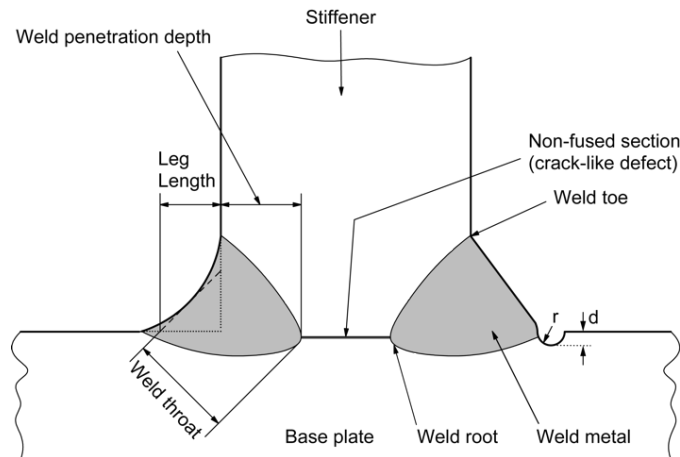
Schematic presentation of weld profiling and weld toe grinding based on [12]
